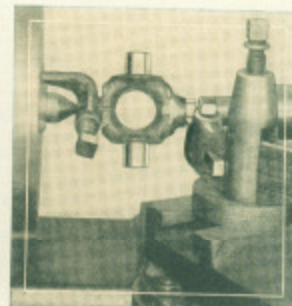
Turning a Knuckle Between Centers in the Lathe
